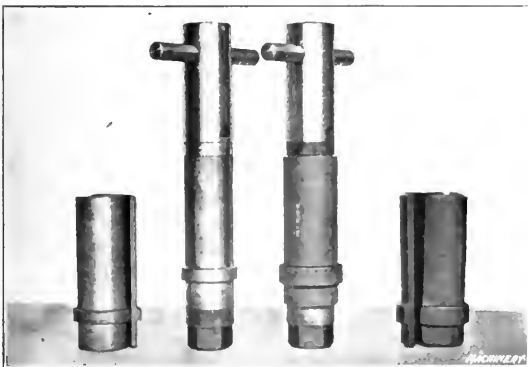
Half-bushings to be machined and Arbor used for holding them while turning Outside
